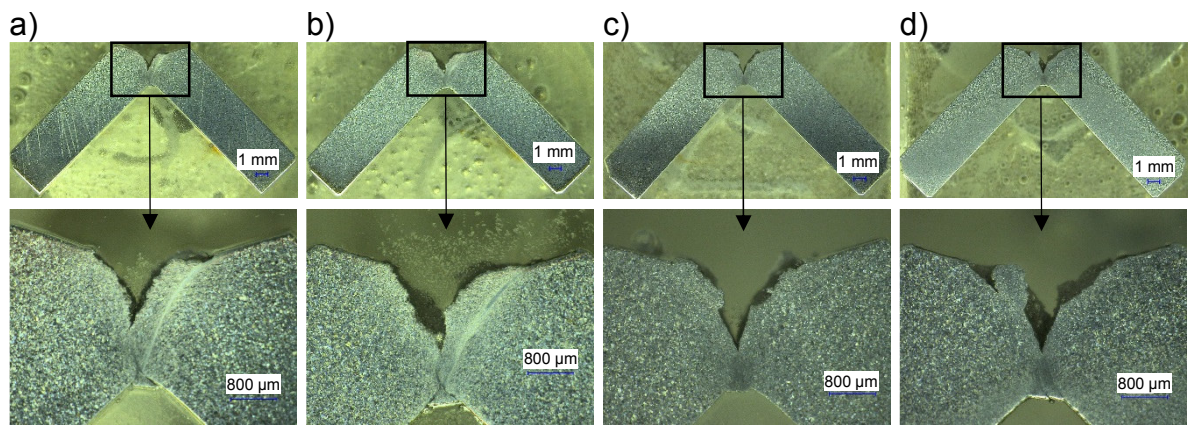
Cross-sectional view of the fractured samples after impact test a) AW, b) AW SP, c) PWHT and d) PWHT SP.
